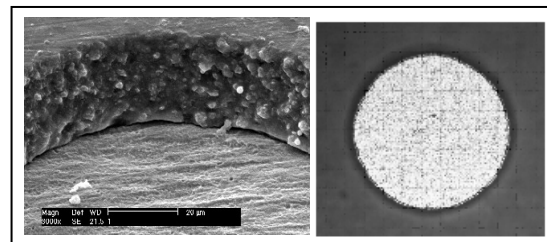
Solder Mask Openings on NEAP Treated Surfaces
